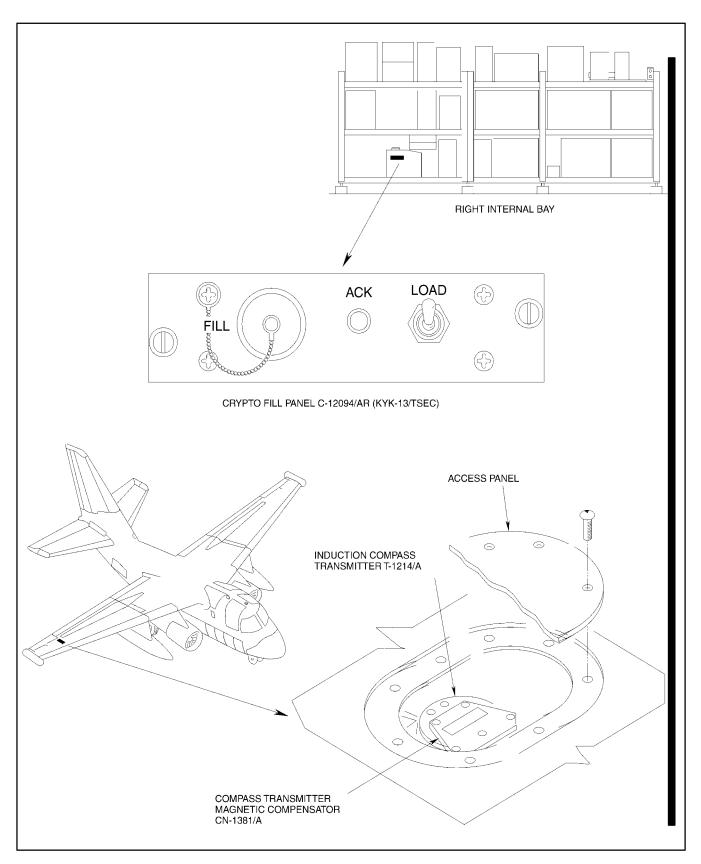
CAINS II Component Location (Aircraft Incorporating AFC-279) (Sheet 2)
